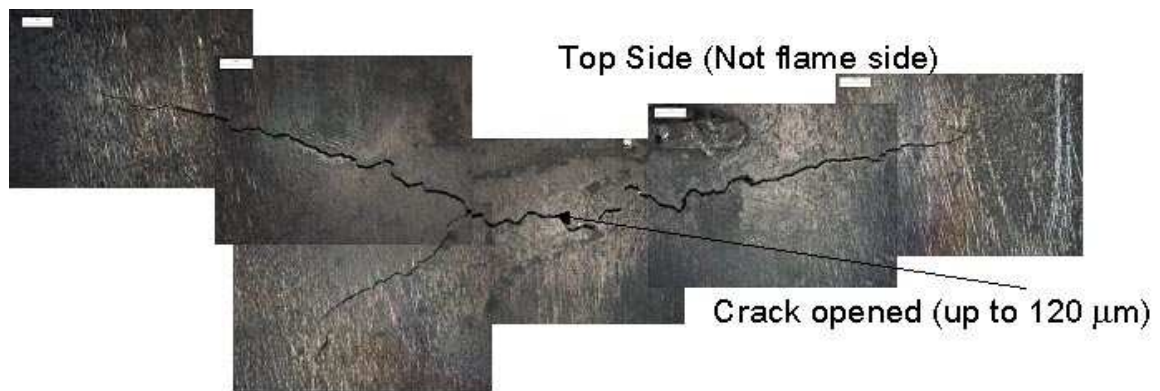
Microscope composite image of the top surface of the blister specimen, showing the overall crack pattern.
